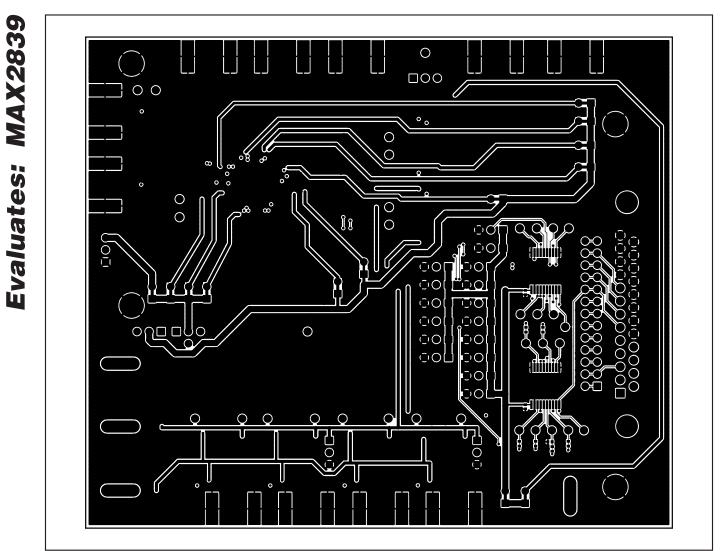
MAX2839 EV Kit PCB Layout—Solder Side
